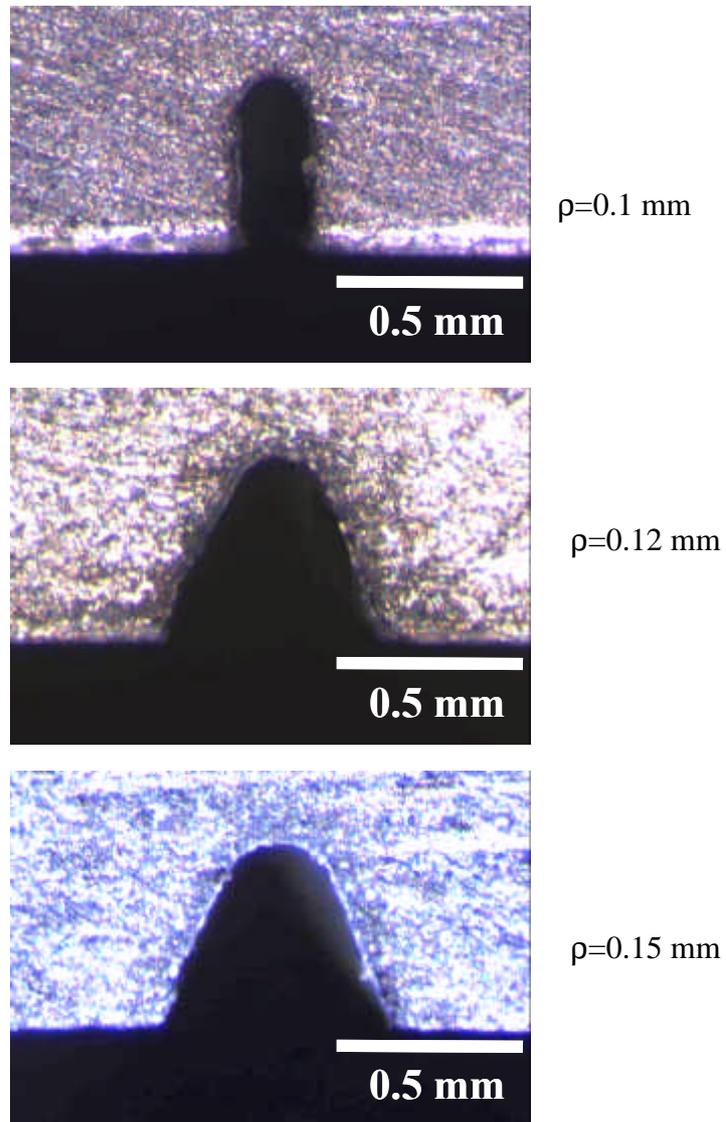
Cantilever beam specimens with the notch tip radius ranging from 0.1 to 0.15 mm.
